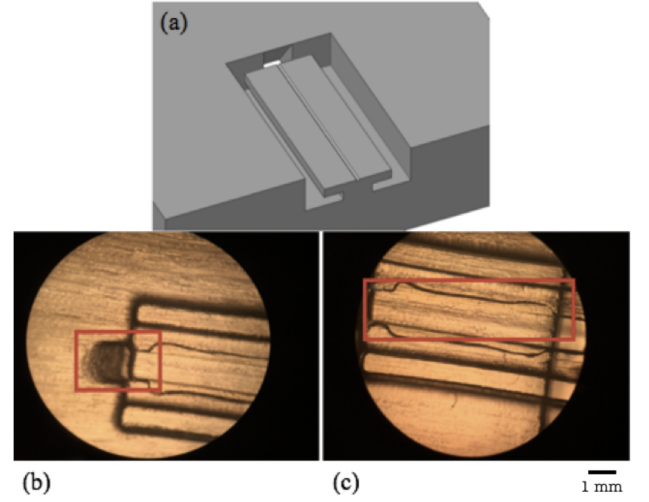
a) CAD drawing of the hole located at the end of the V-groove and b) micrograph of the hole and c) micrograph of the V-groove after fabrication.
